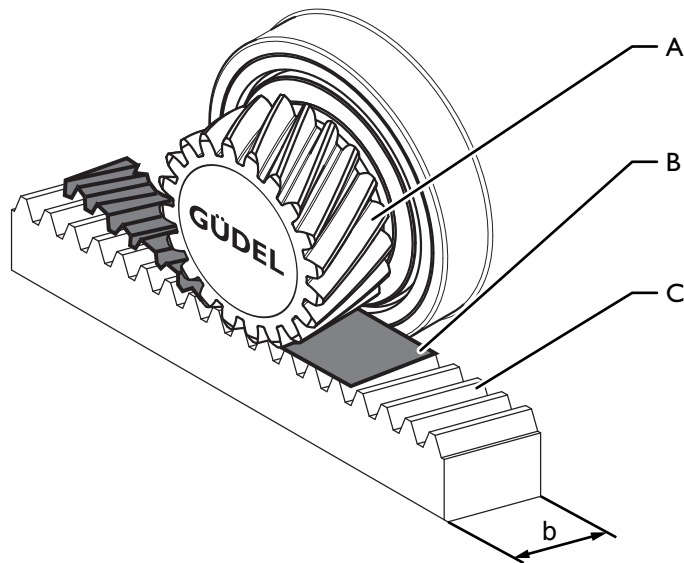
Checking the tooth flank backlash: Paper strip (alternative method)
